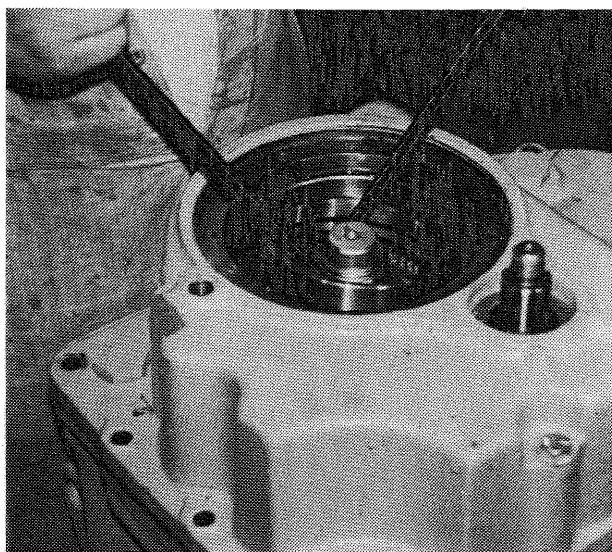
Front Cover & Brake Removal & Disassembly(1 of 3)
